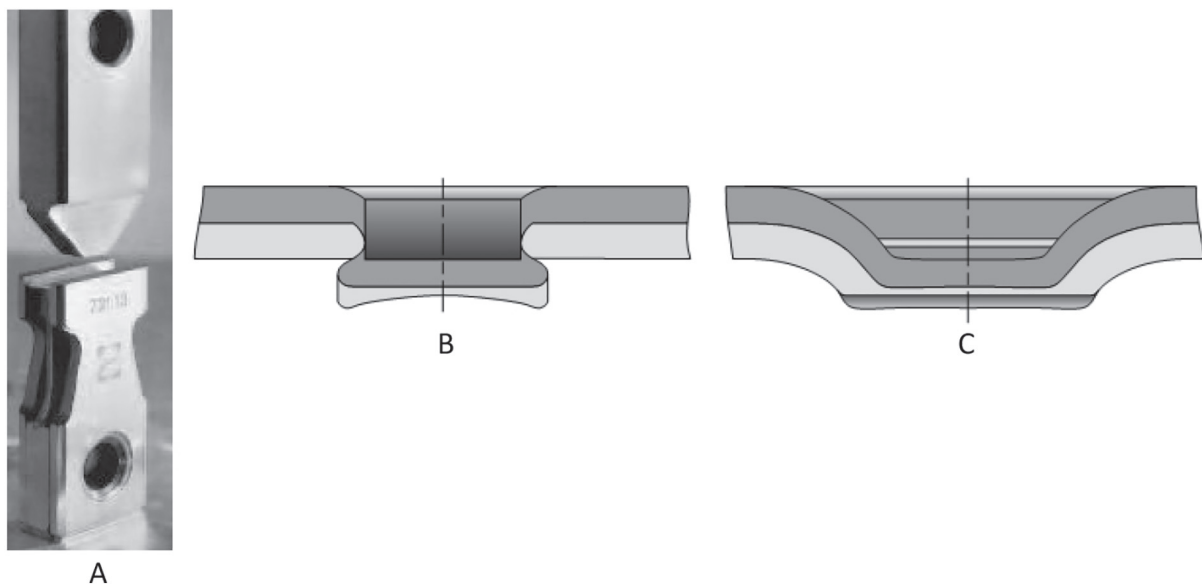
A. Rectangular clinching tools. B. Cross-section front view. C. Cross-section side view.
